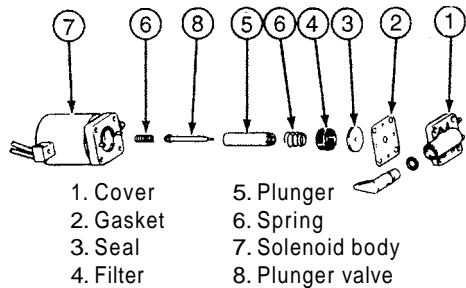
Exploded view of an electric fuel primer assembly used on 65 Jet-115 Hp (1632cc) 900 CV4 motors
